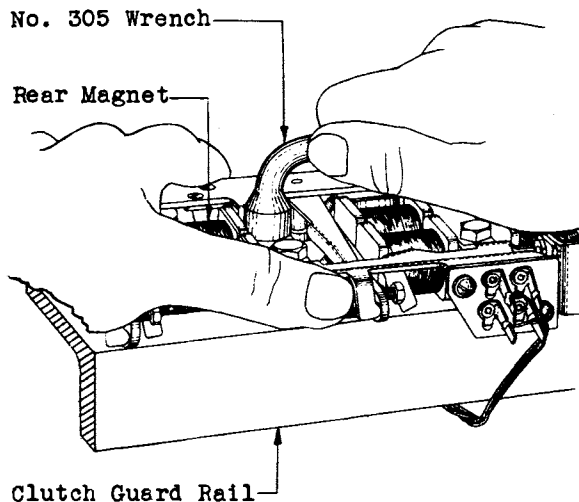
Method of Loosening Rear Magnet Clamping Screw
